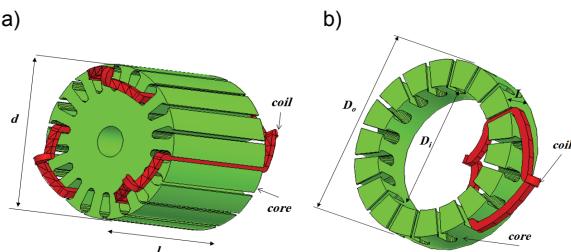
Configurations of axial-field and radial-field machines, (a) Radial flux machine, (b) Axial flux machine
